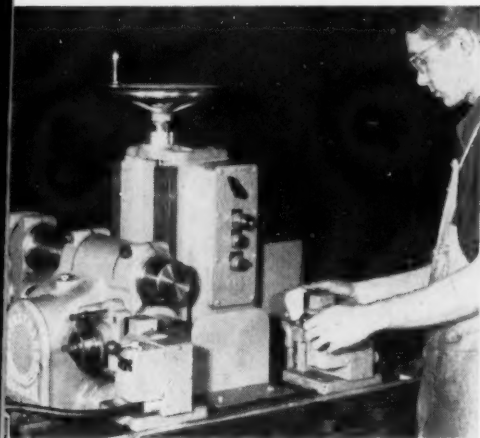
Milling small, thin castings by reciprocal cycle on two magnetic fixtures.
